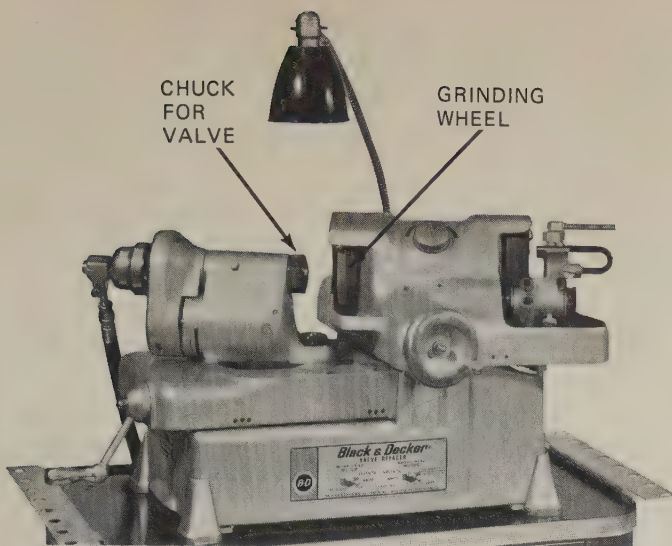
Valve-refacing machine, also called a valve grinder. (Black and Decker Manufacturing Company)
